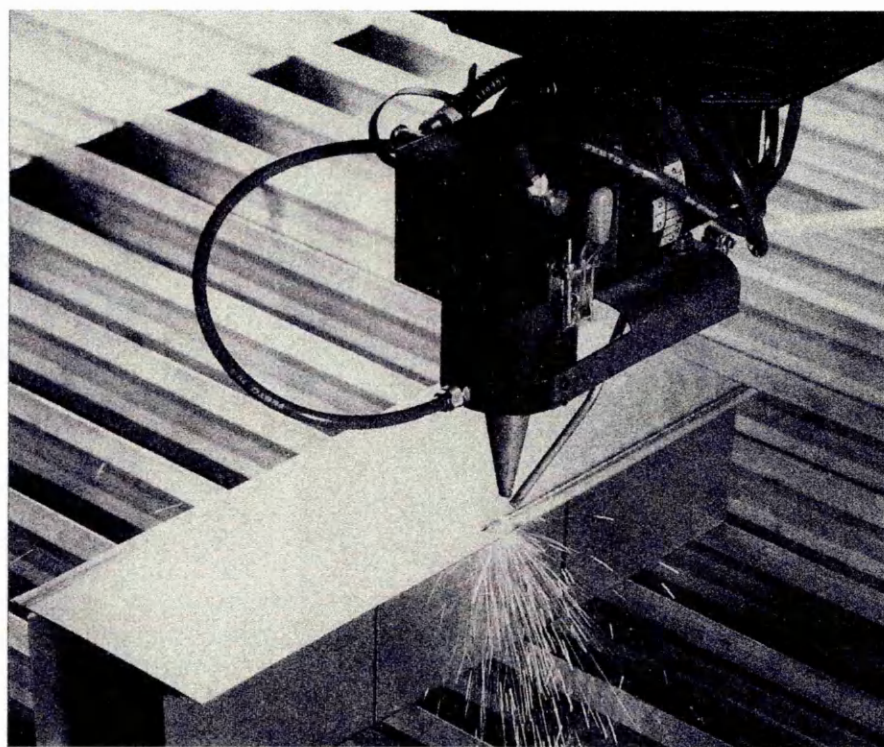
Welsh Technology Centre Trumpf 5kW CO₂ Laser Welder
